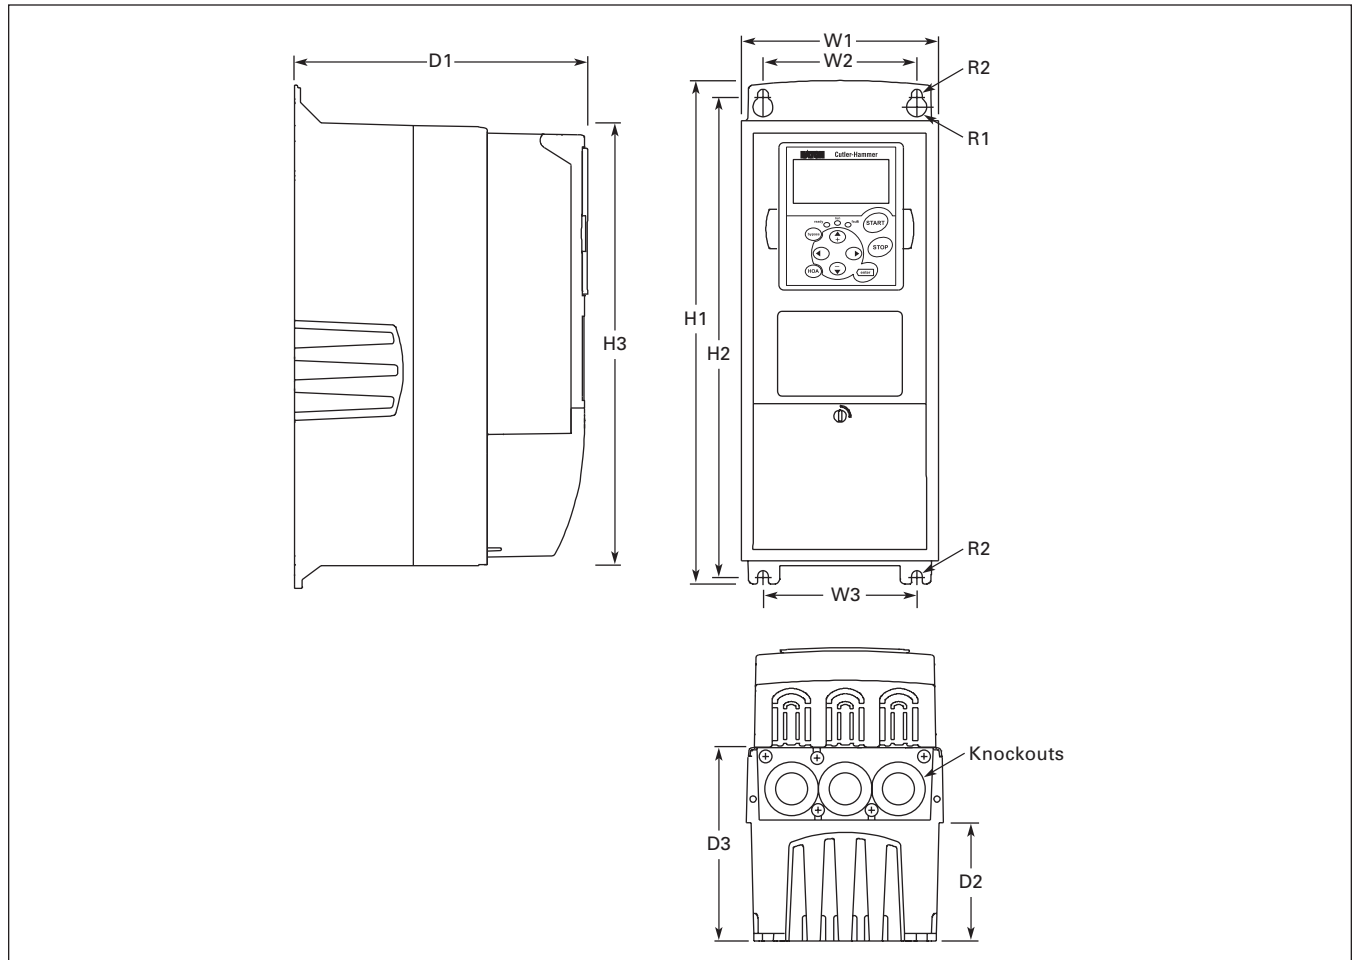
NEMA Type 1 and NEMA Type 12 9000X Drive Dimensions, FR4, FR5 and FR6
